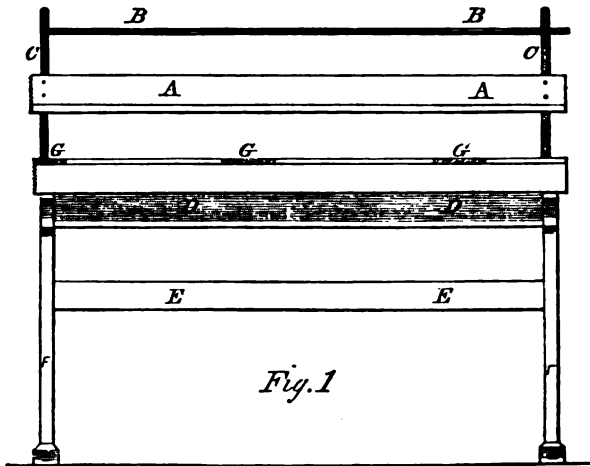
FRONT VIEW OF DRAWING DESK.
